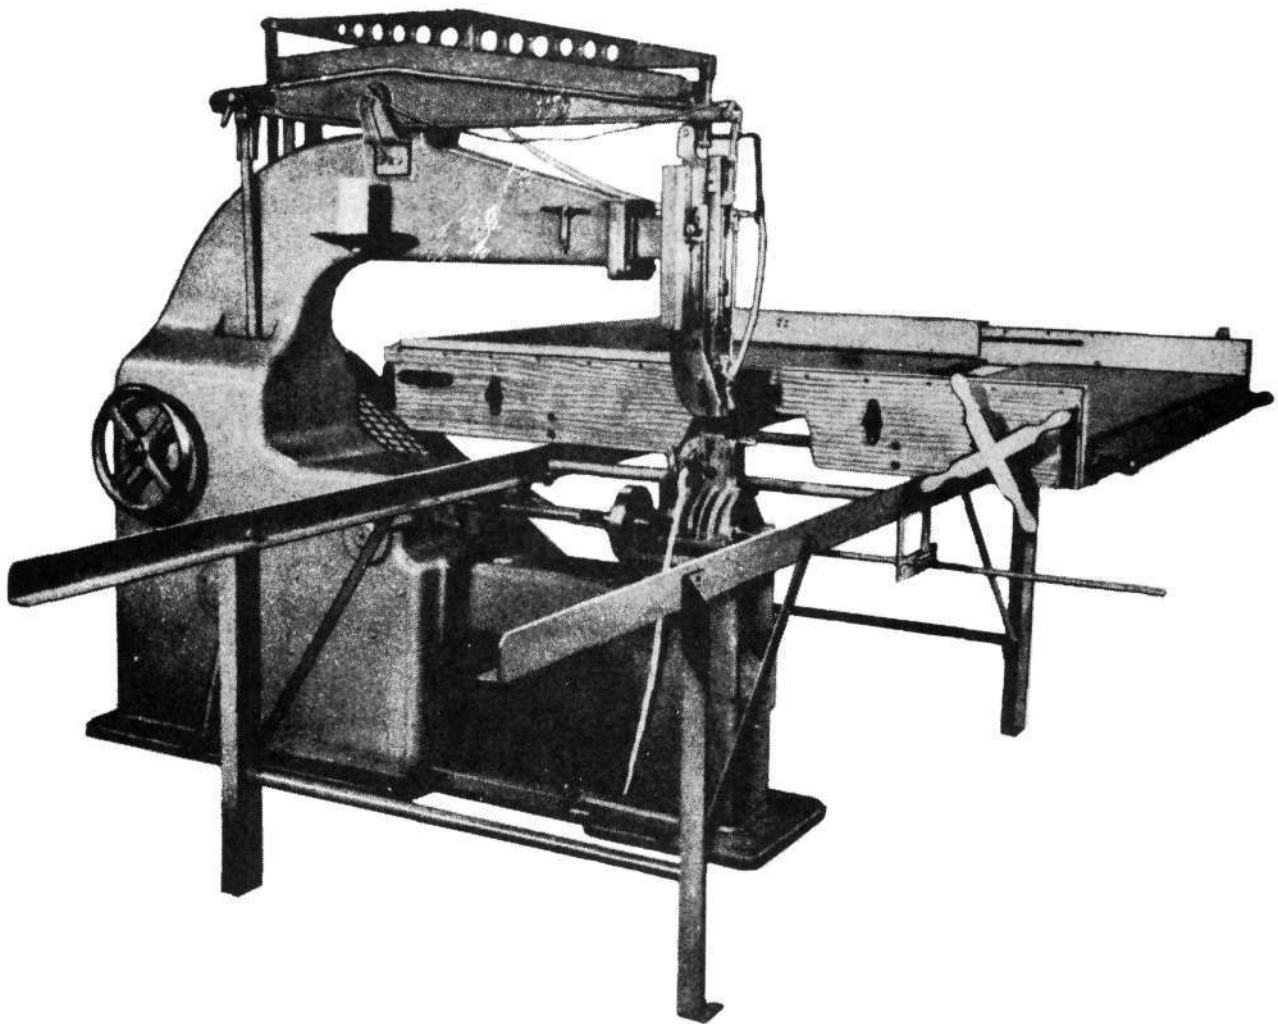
United Mattress Machinery Company Cotton Tufter Machine.
